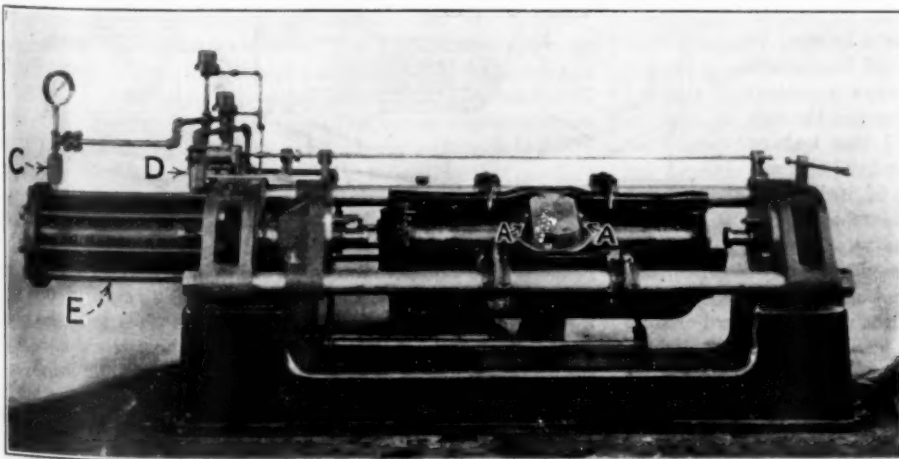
FRONT VIEW OF 30-TON CHEVROLET TRUCK AXLE-ASSEMBLING PRESS, WITH AUTOMATIC CLAMPING FIXTURE
